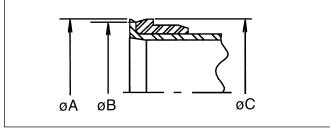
Visual Inspection: Diameter A should fall between diameters B and C
